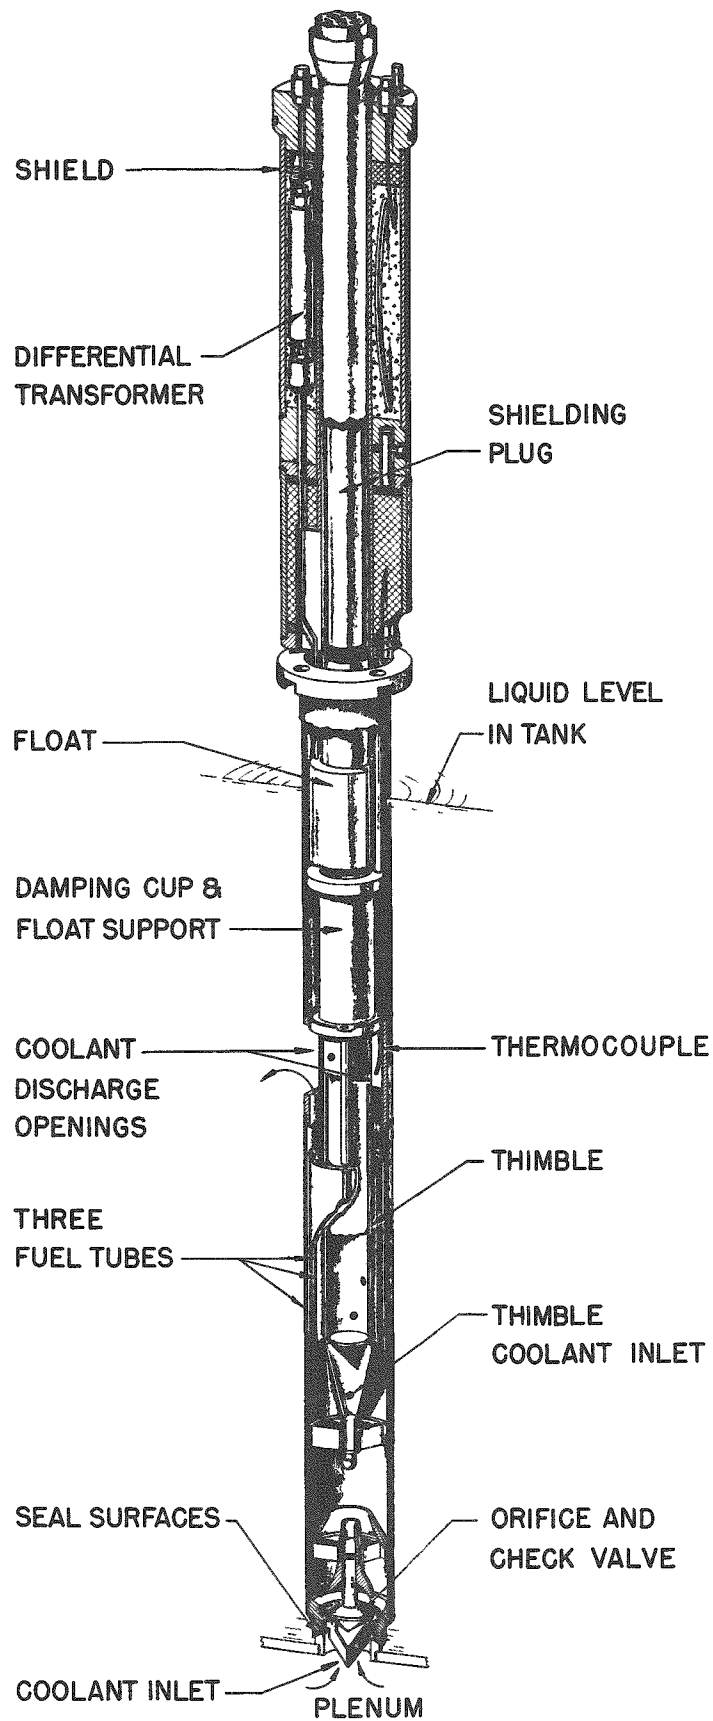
CP-5 Fuel Assembly. ANL Neg. No. 144-82 Rev. 1.
